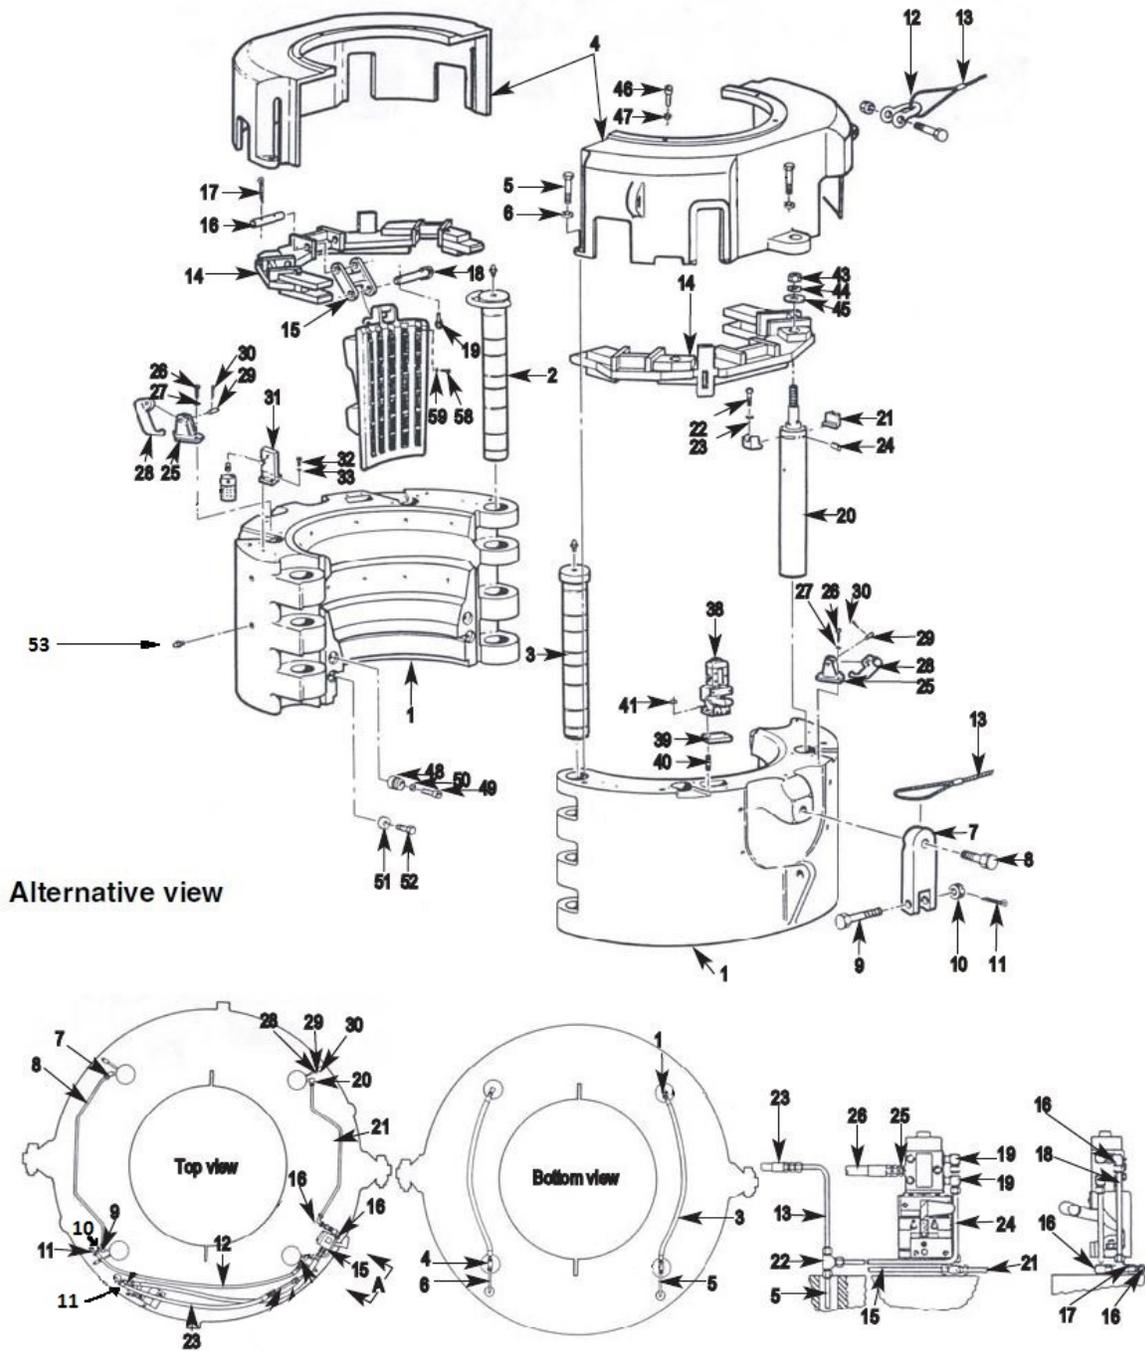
750 Ton 24.5" Elevator/Spider Assembly
